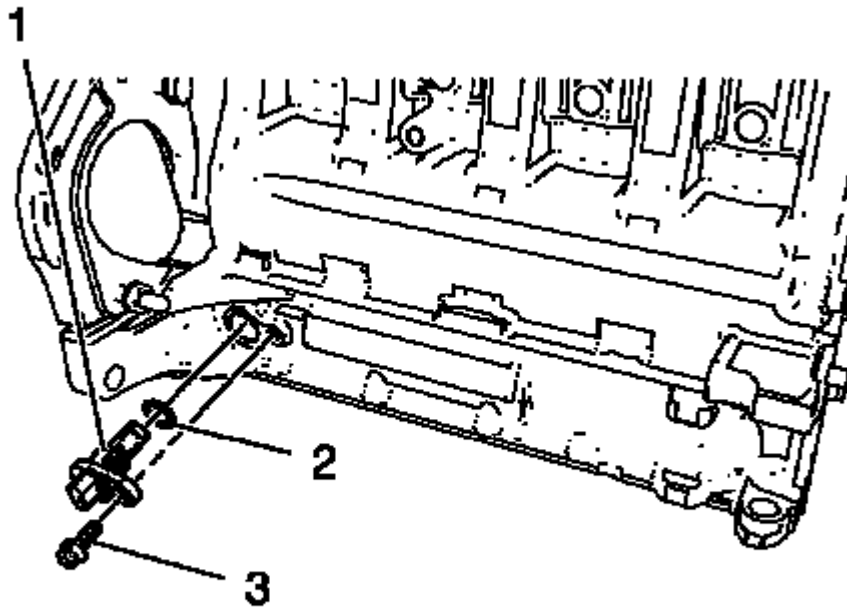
Crankshaft Position Sensor, Bolt And Seal Ring
